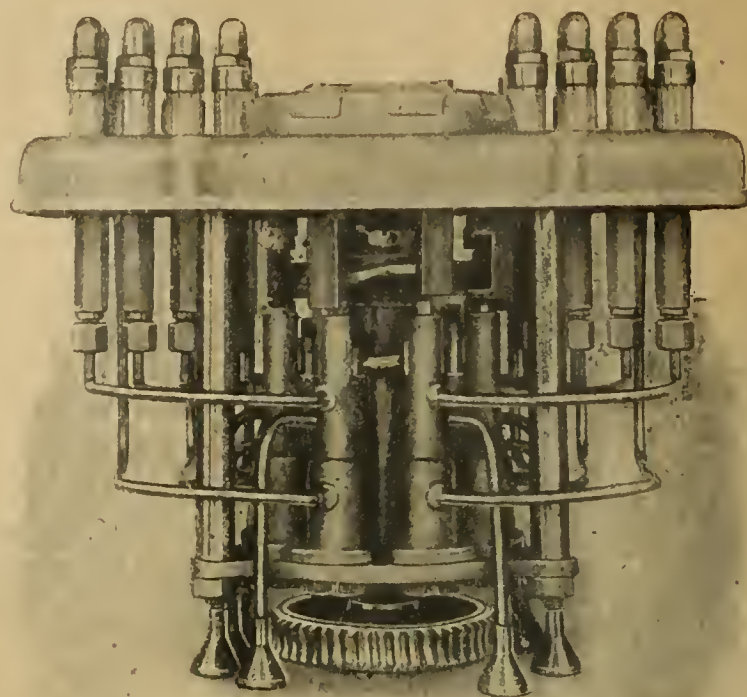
BOSCH FORCE FEED LUBRICATOR.
